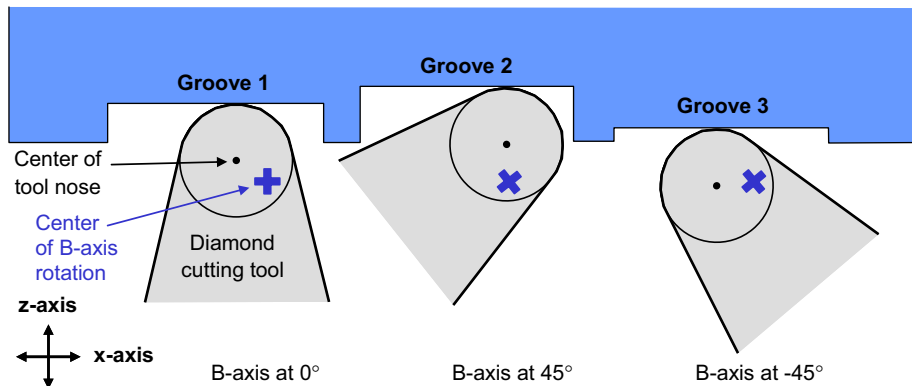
Three grooves machined in the workpiece using different *B*-axis angles.
